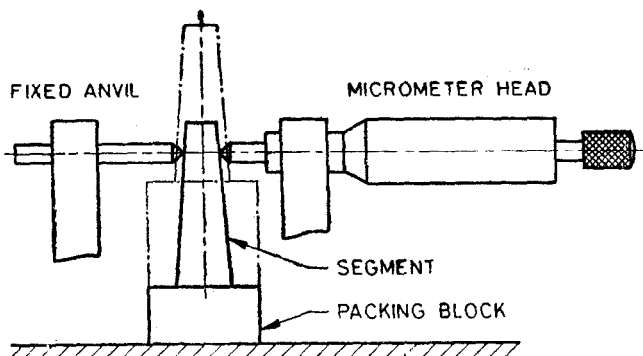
MEASURING TECHNIQUE (METHOD 1)
